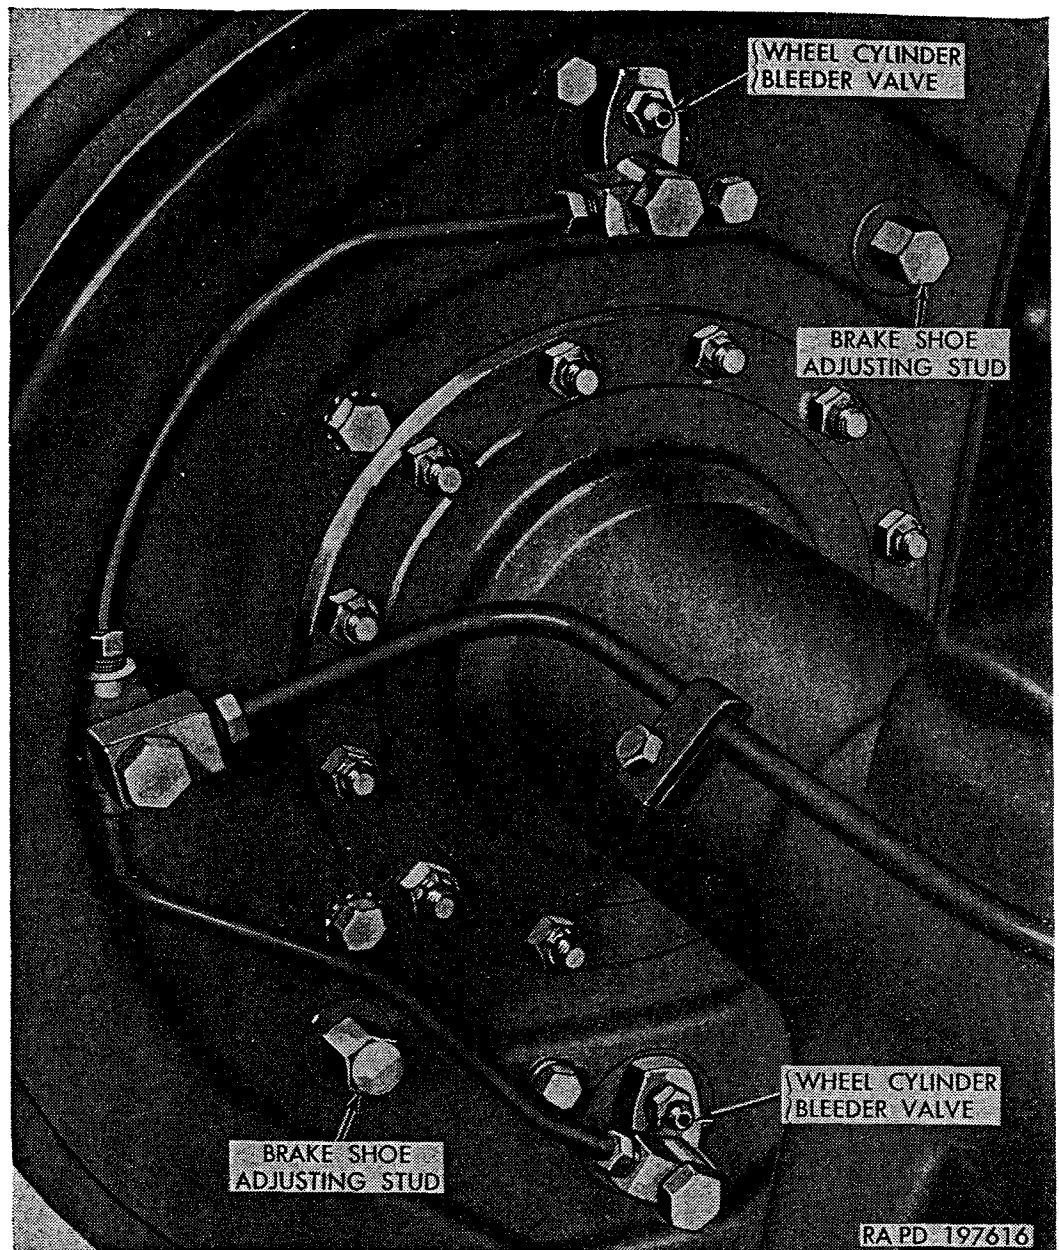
Brake bleeder valves and adjusting studs (rear wheel shown).
